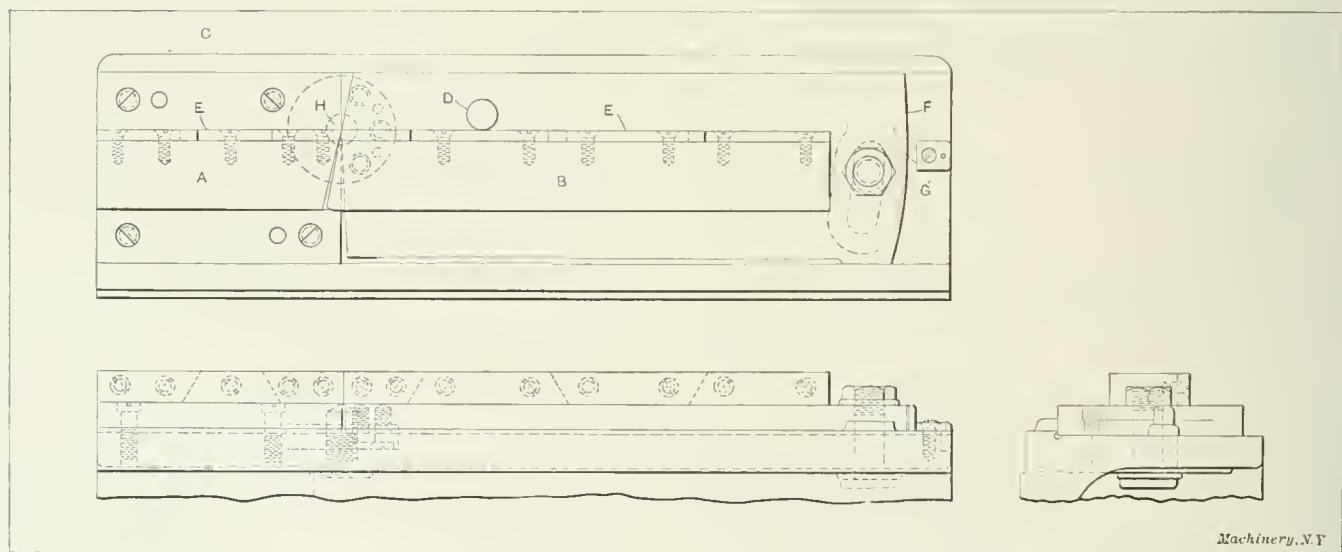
Taper Attachment for Threading Taps of the Type shown in Fig. 4
